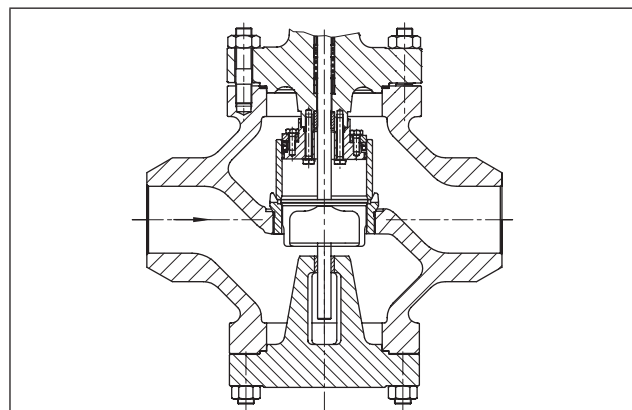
Type 3254 Valve with welding ends and balanced plug
